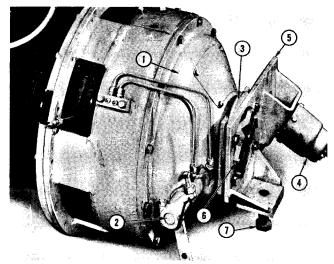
AIR CHAMBER MOUNTING BRACKET
